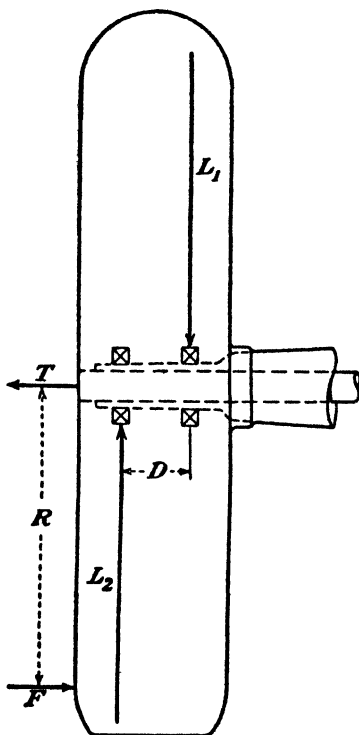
BEARING LOADS DUE TO SIDE THRUST ON WHEEL IN FULL-FLOATING AXLE.
